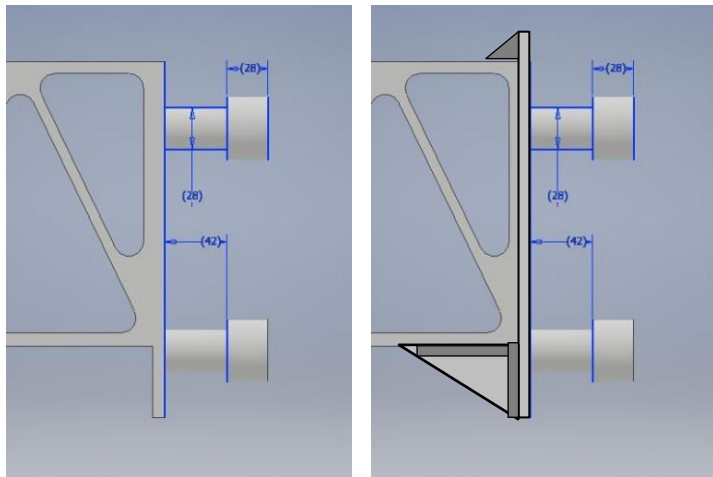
Concepts for extended end plate to be used in the studded connection, extruded (left) and welded (right)
